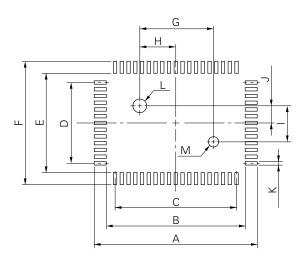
Drawing of Conversion Socket (EV-9200G-64) (for reference only)
